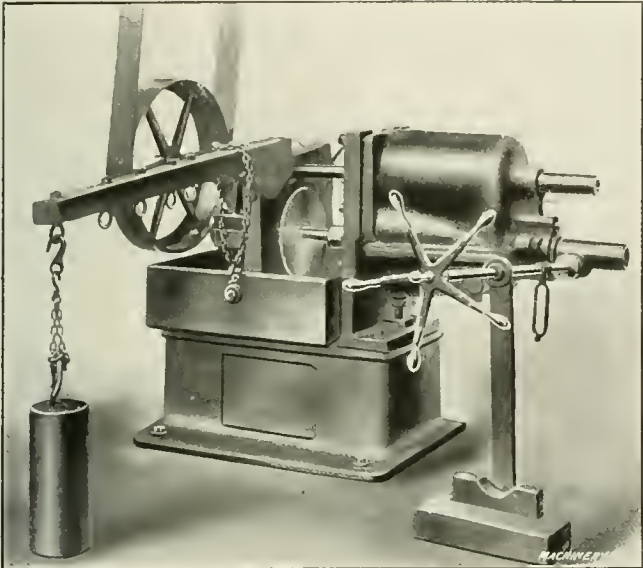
Testing the Speed-box Gearing before Assembling on the Machine
